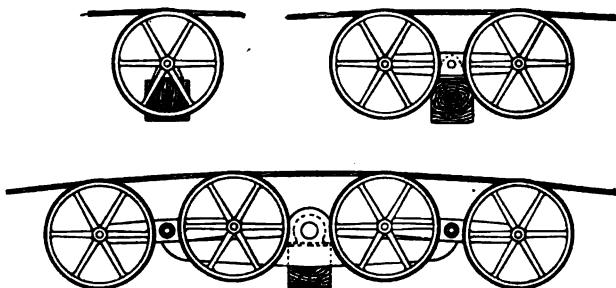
Grouped Sheave Mountings with Balance Beams.
